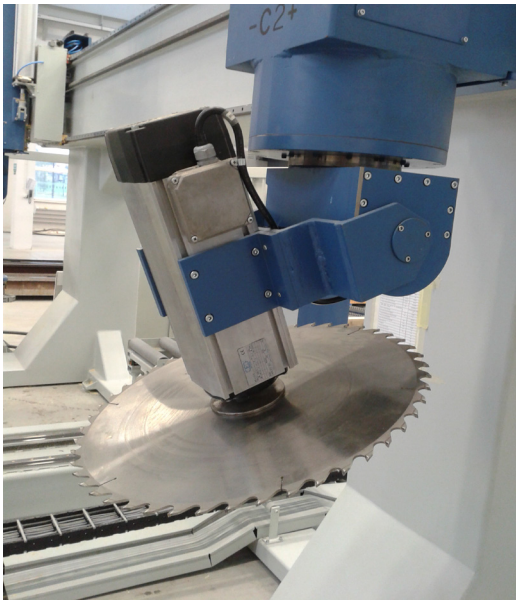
Rotationnal-tippable cutting head equipped in disc saw
